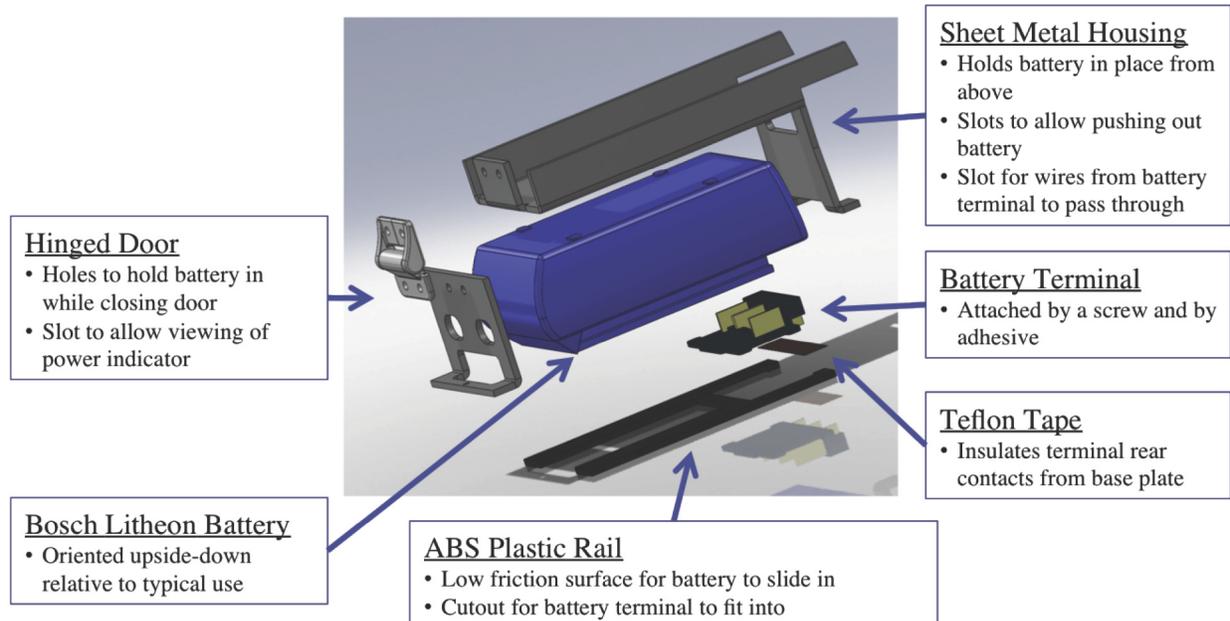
Labeled SolidWorks rendering of battery enclosure assembly design, exploded view.
